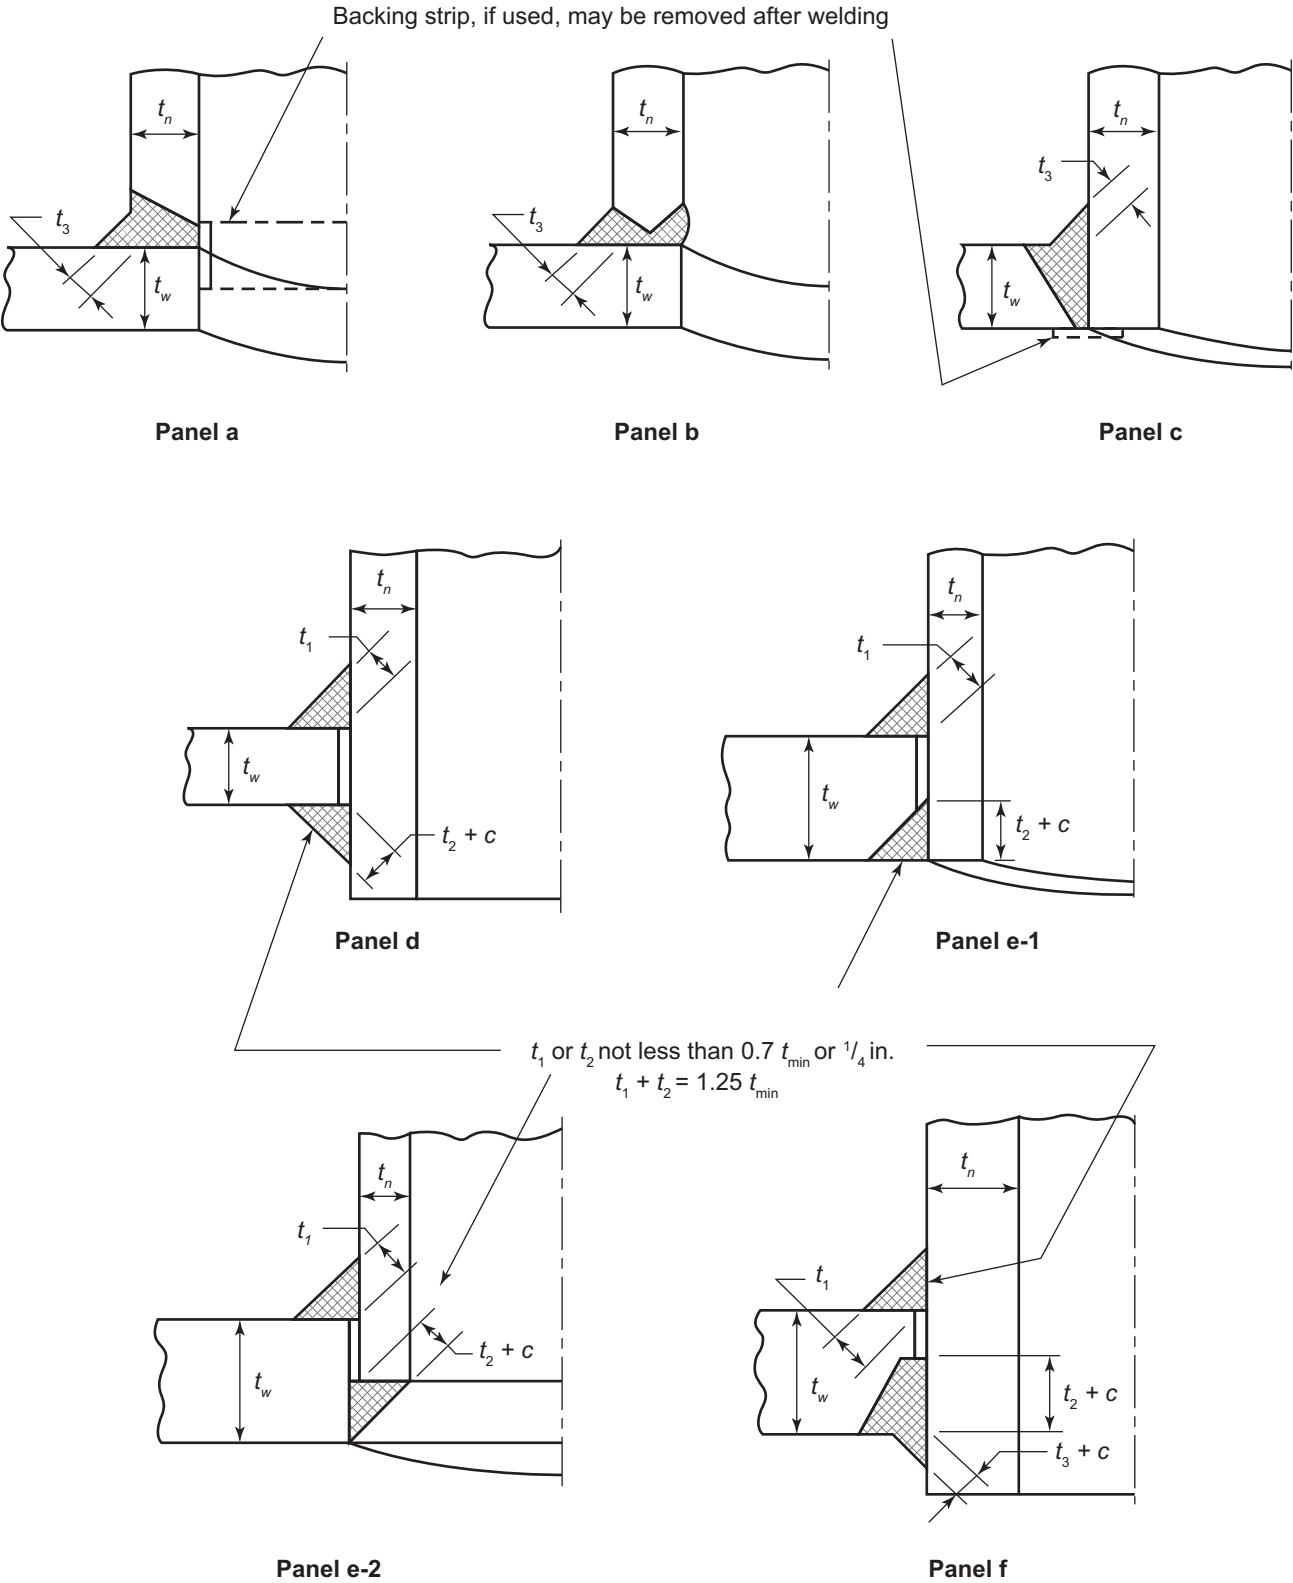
Part 1—Acceptable Types of Welded Nozzles and Other Connections
